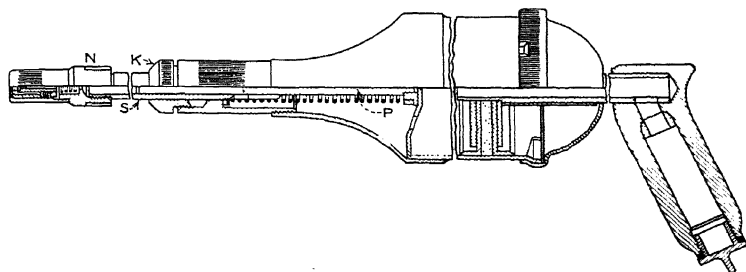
Automatic hydraulic-type gun with filler-type handle.
